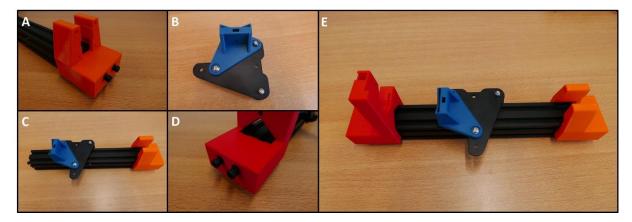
Building the X Plate Pump frame. A) X X Motor Stepper Mount installation. B) X Slide Mount orientation. C) Rail assembly D) Fastening the M5x45 screws on the X X Motor End Mount. E) Completed X Plate Pump frame.
